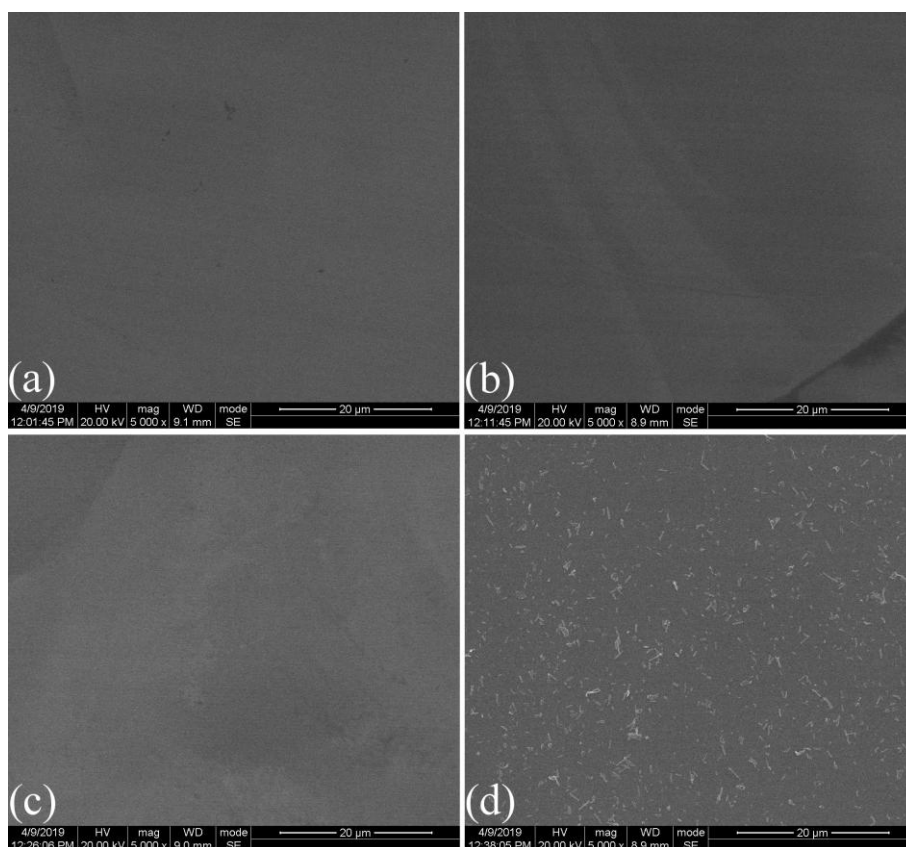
SEM images of machined surface after diamond turning using different rake angles. Rake angle: (a) 0° ; (b) -15° ; (c) -30° ; (d) -45° .
